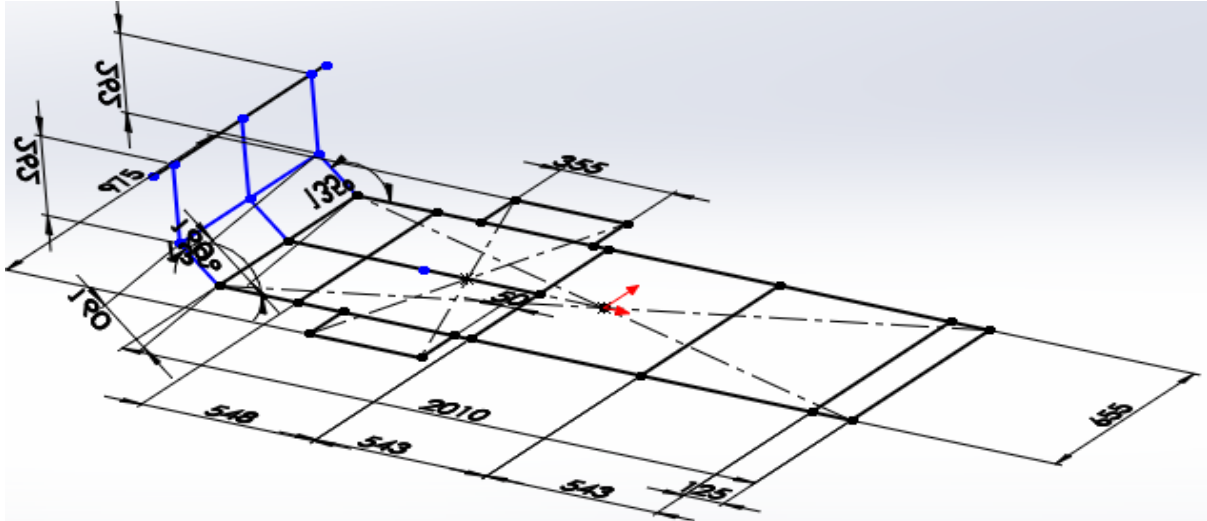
10: 2D drawing of Three Wheeler vehicle Chassis frame
